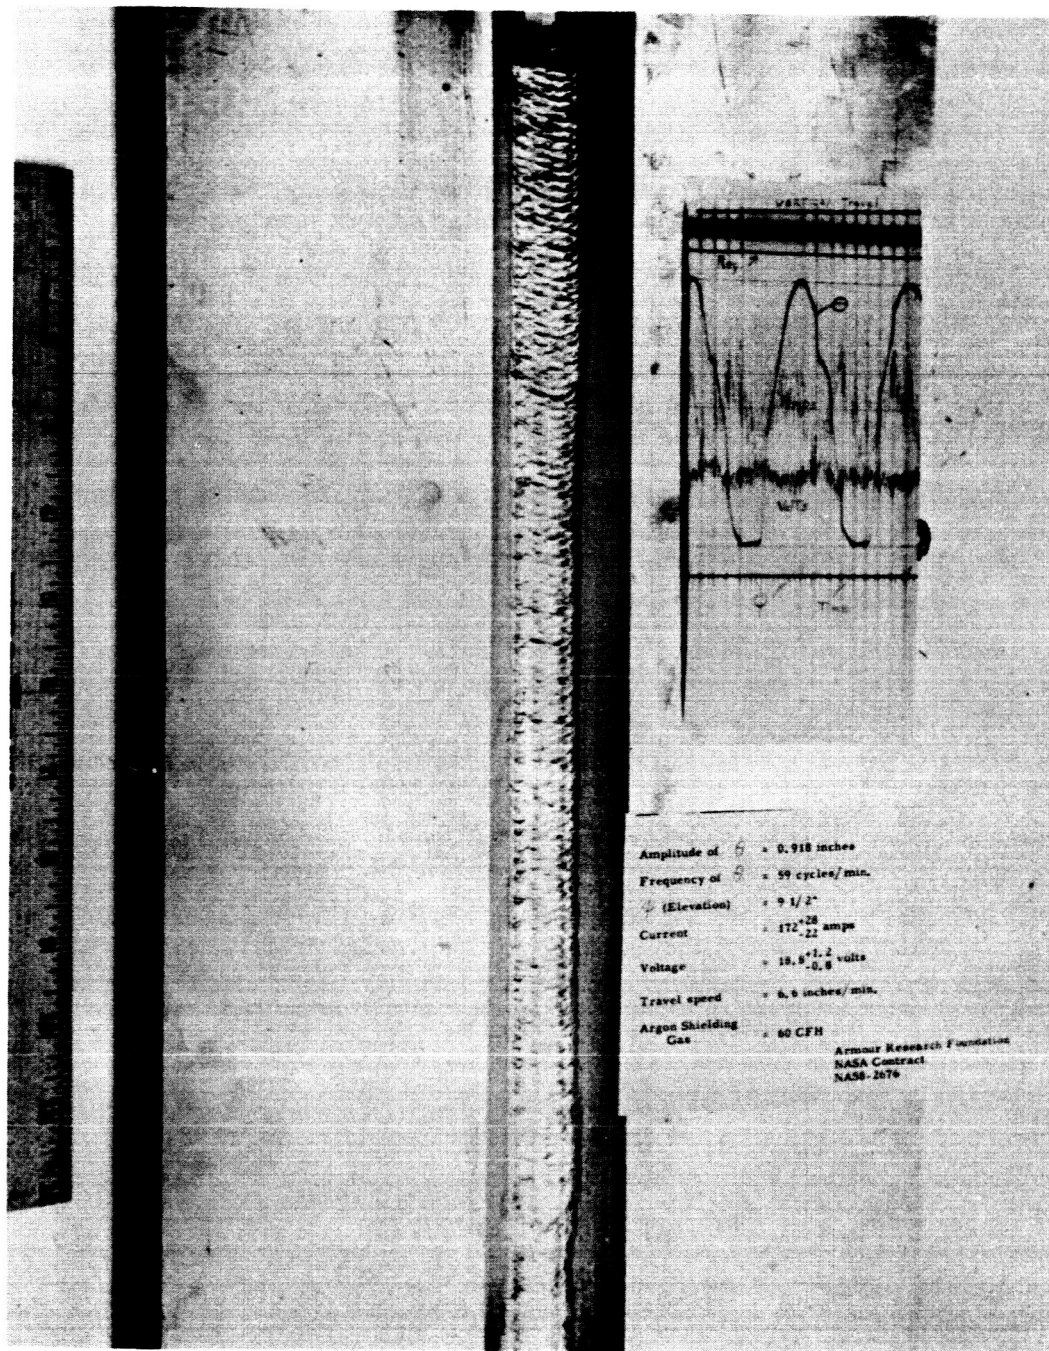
OSCILLOGRAPH RECORD OF FIRST-PASS WELD
